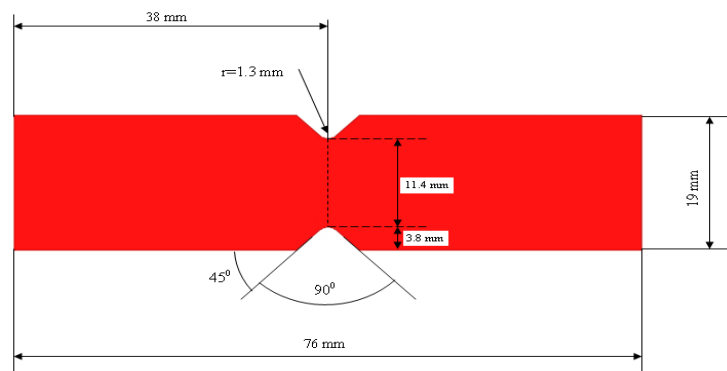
Dimensions of the ABS shear test specimen, $t=3.18$ mm
